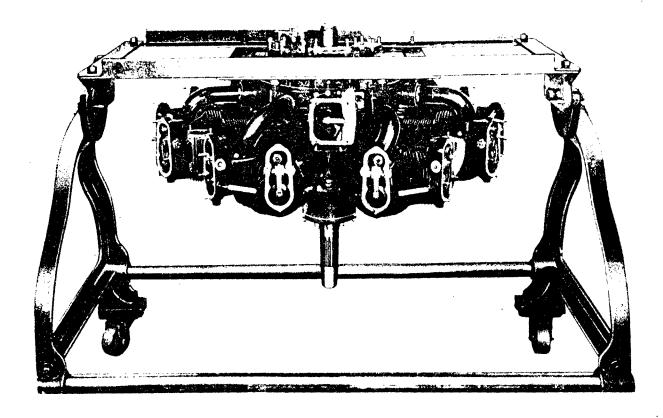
Inverted Horizontal Position of Engine Mounted on Overhaul Stand
